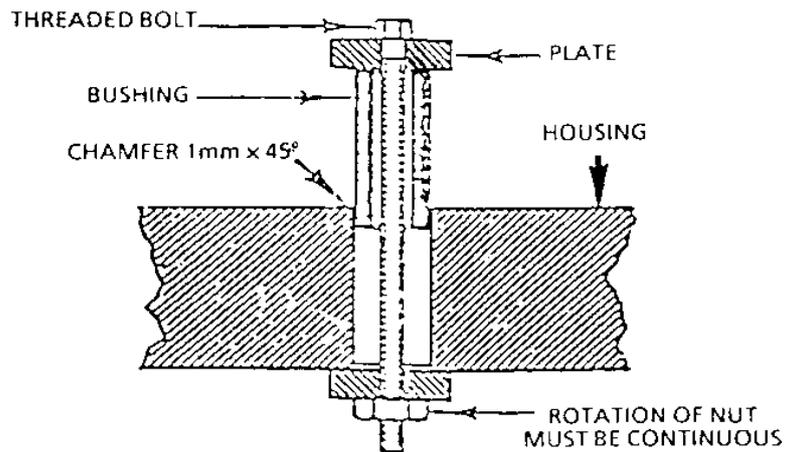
Bolt-and-nut method of pressing graphite bushing into housing.
